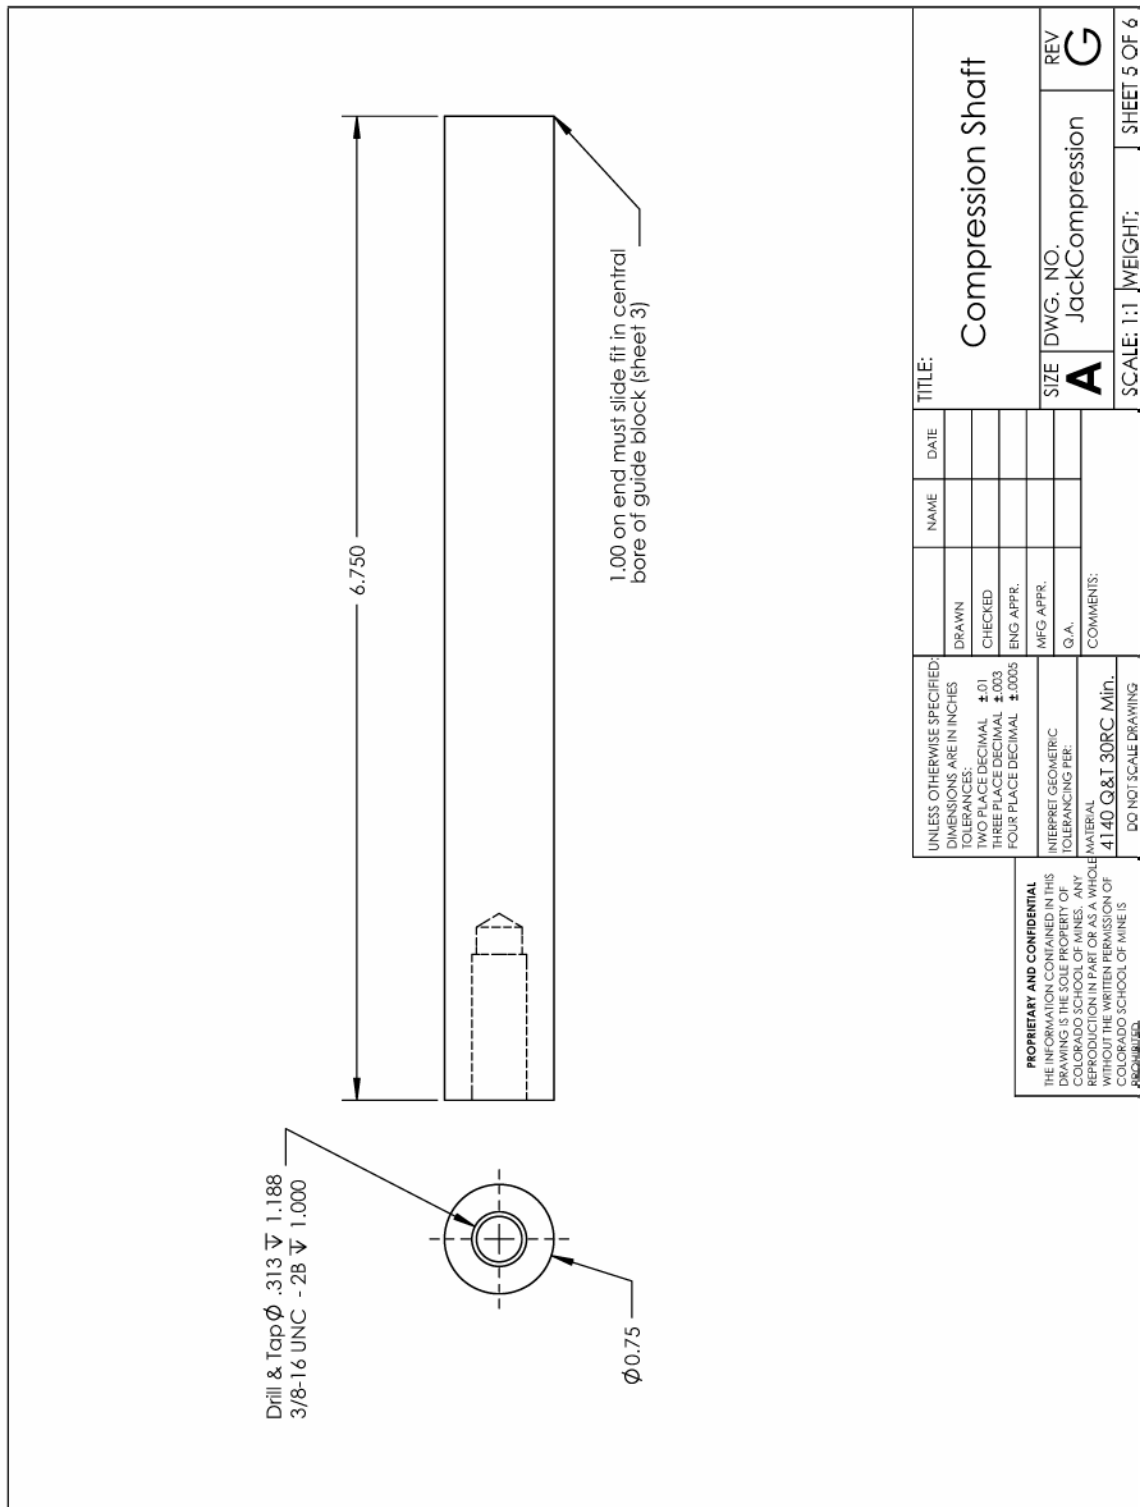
Shop drawing of compression shaft. The shaft attached directly onto the screw jack and press against the guide block carriage.
